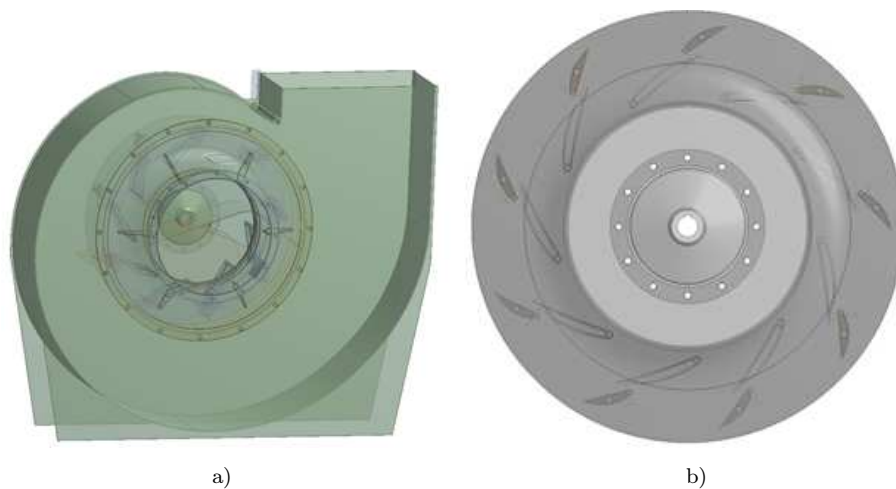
Modified radial fan: a) general view, b) impeller with movable blade tips [9].
